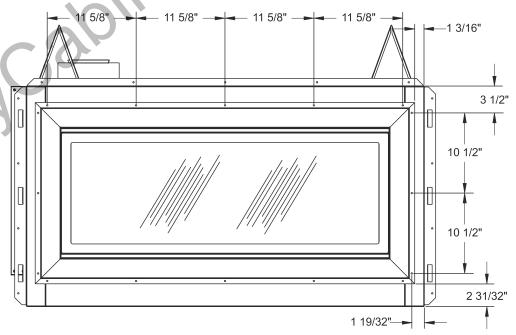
Installing Exterior Door for See-Thru In/Out Application
